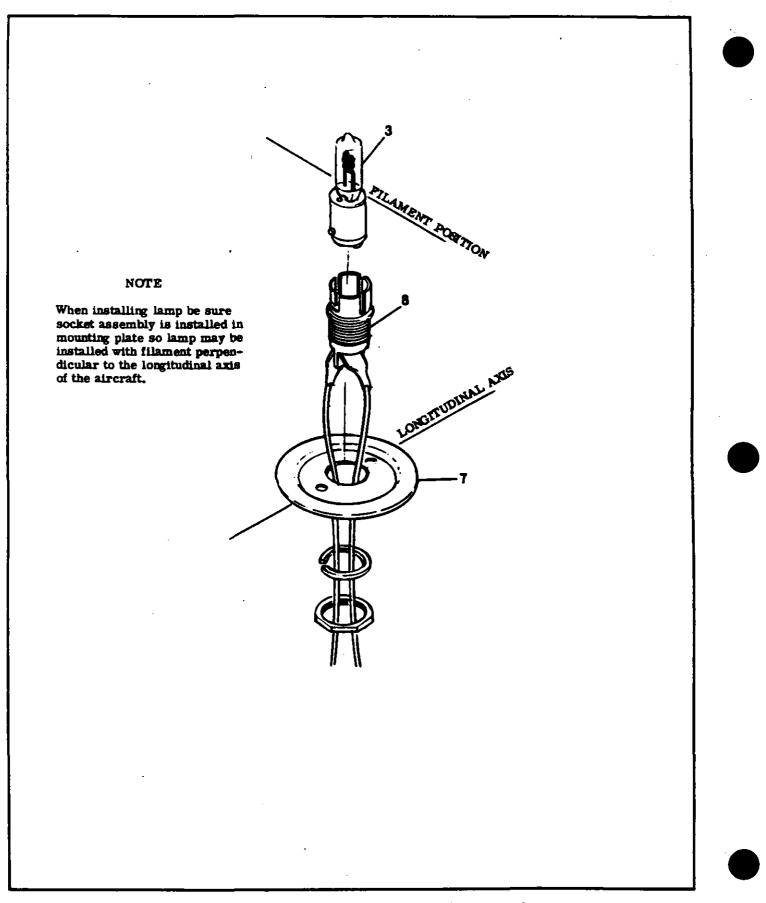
Flashing Beacon Light Installation (Sheet 2 of 2)
